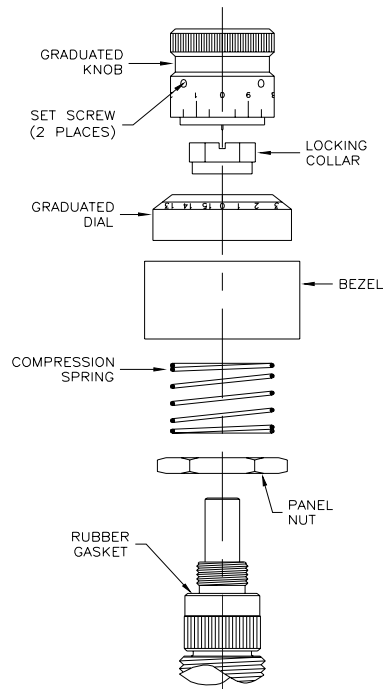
HR Series Metering Valve with Turns Counter Handle Exploded View
